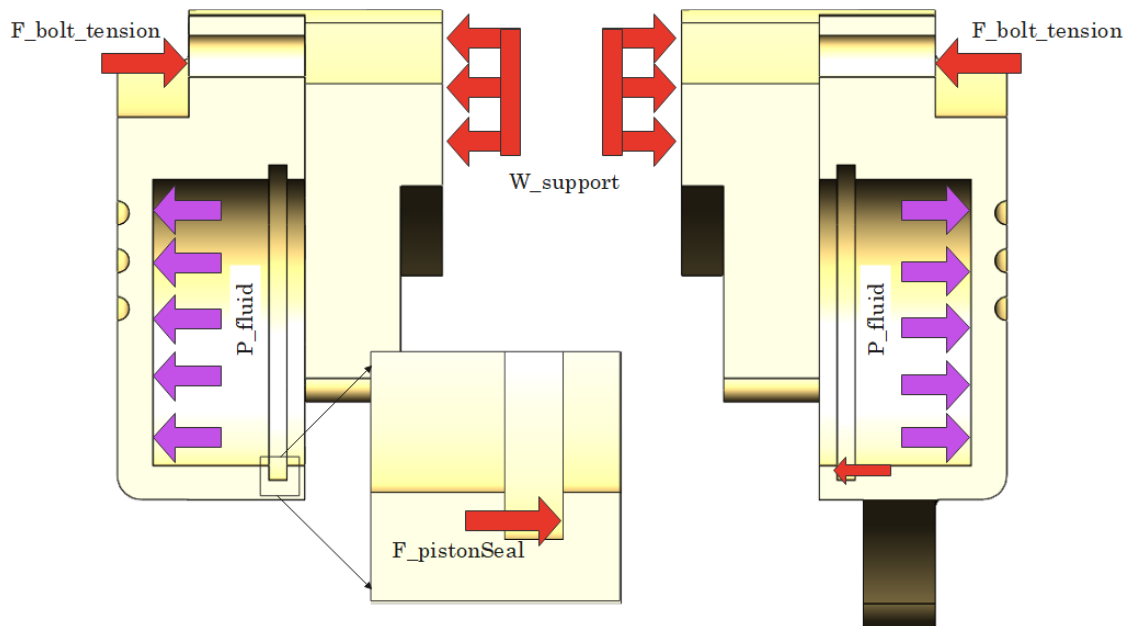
Cross-section perpendicular to rotor plane. Calliper body FBD.
